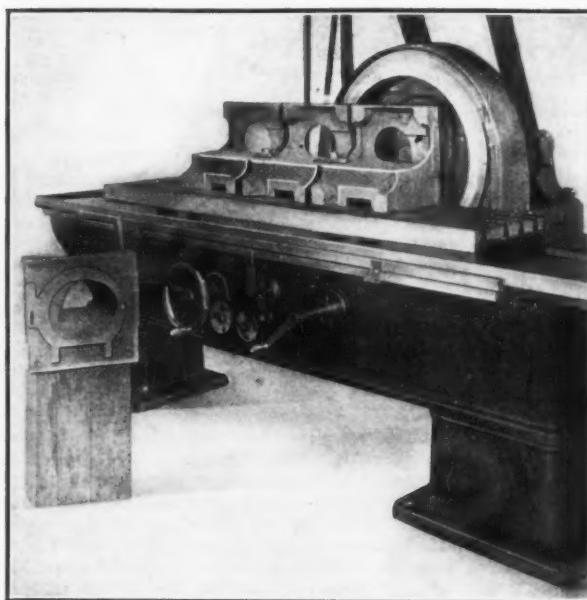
The Machine as Used for Grinding Miscellaneous Work.
